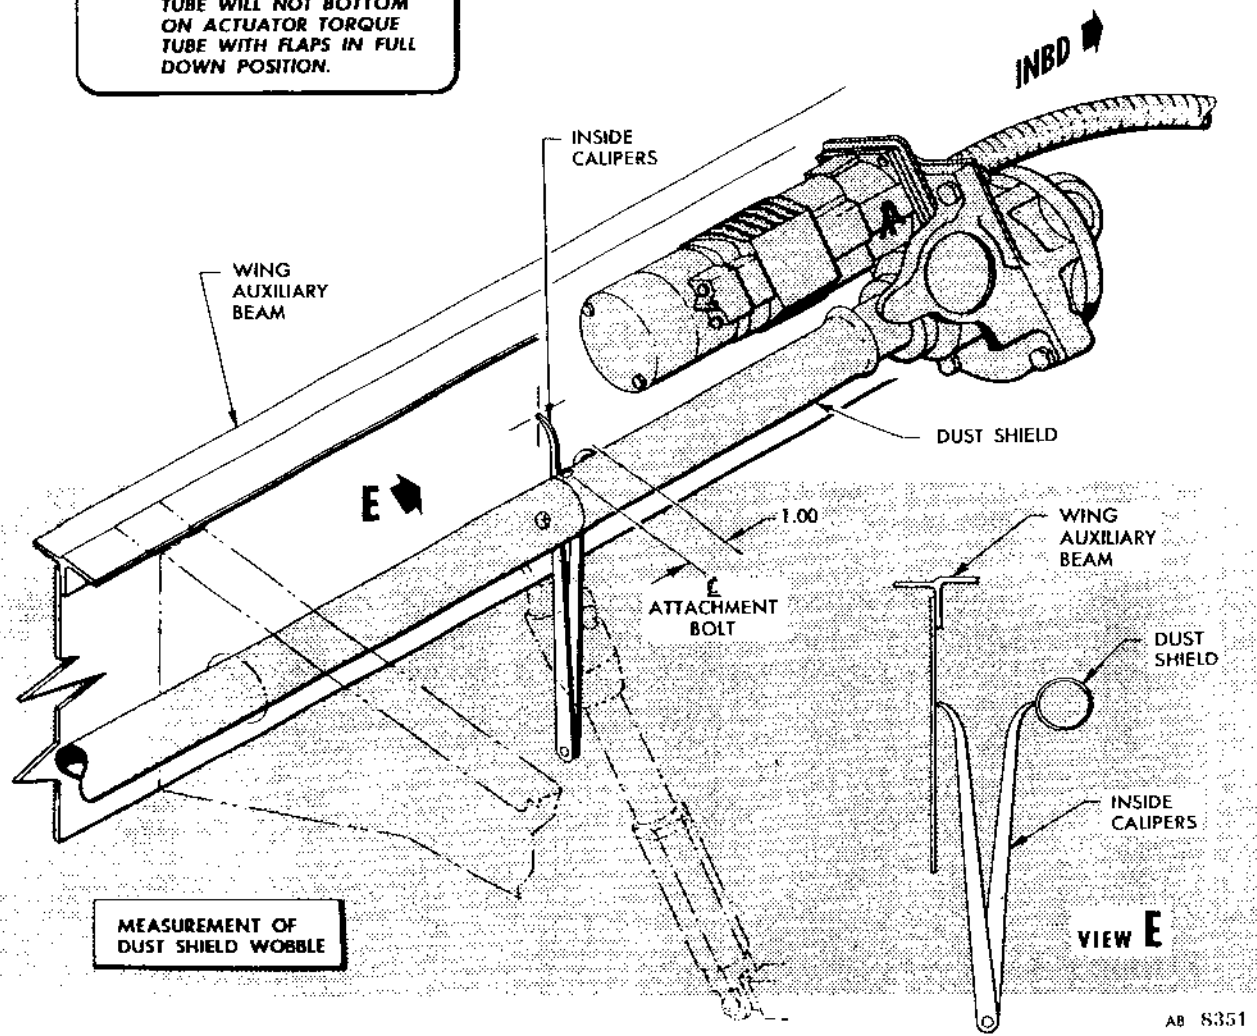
(Sheet 3 of 3 Sheets) — Wing Flap Installation
